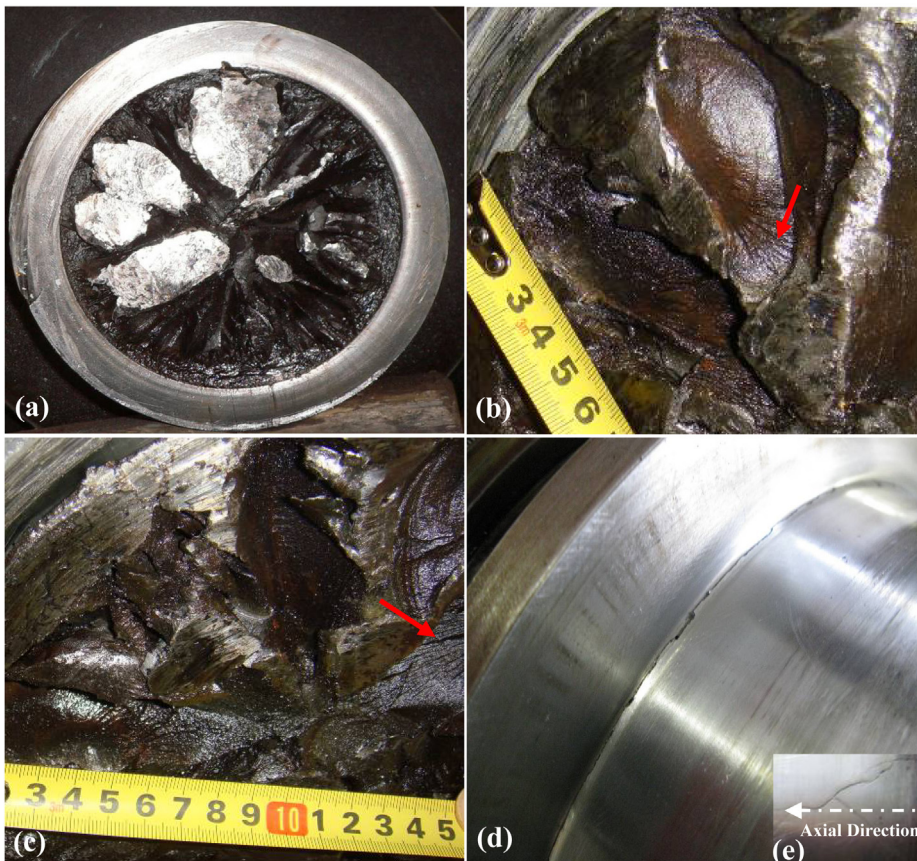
The macroscopic feature of the shaft's fracture (a) whole fracture morphology; (b) beach marks; (c) fatigue cracks; (d) location of crack; (e) direction of crack growing.
